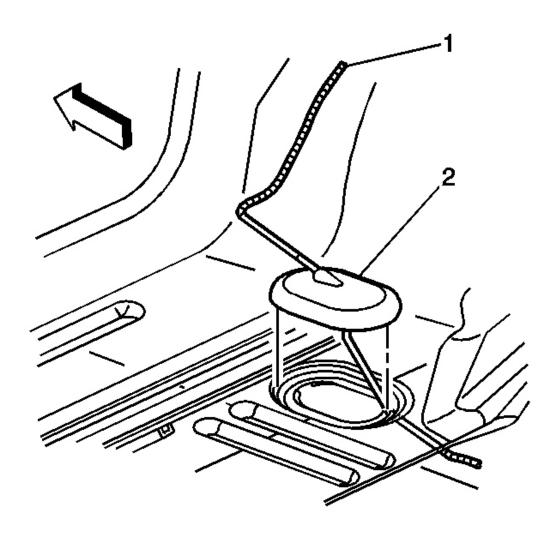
View Of Cable Grommet At Floor Panel Courtesy of GENERAL MOTORS CORP.
